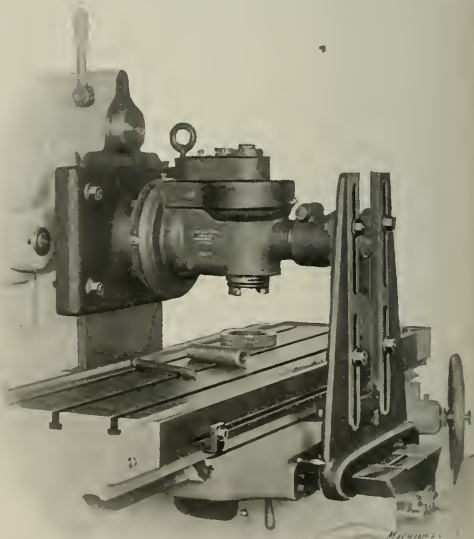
Vertical Attachment for New Design of Milling Machine.
